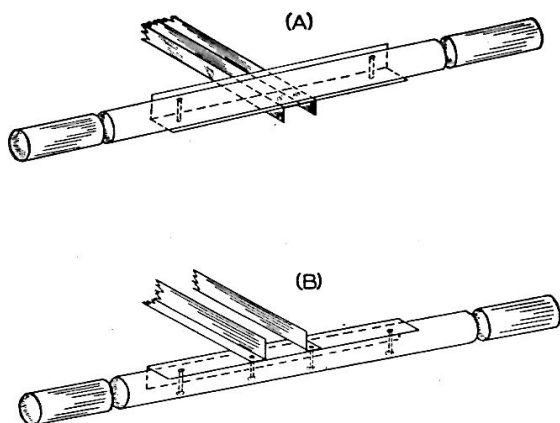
Detail sketches showing method of mounting elements in the dual array for 28 and 50 Mc. A — The 50-Mc. boom is comprised of two pieces of angle stock mounted edge-to-edge to form a channel. The elements are fastened to the boom by means of a cradle, also of angle stock. B — In the 10-meter array, the two portions of the boom are separated, and mount on either side of the vertical support. The elements and their supporting crossarms are attached to the lower surface of the boom.
